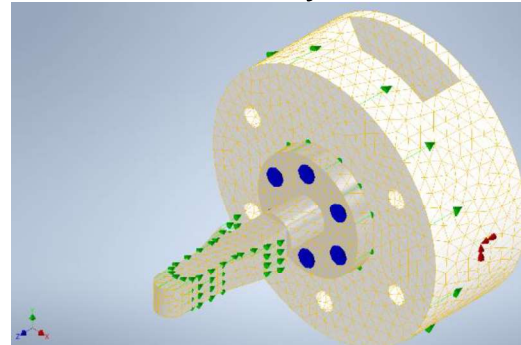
Specified constraints, loads, connections, and generated mesh for motor subassembly
